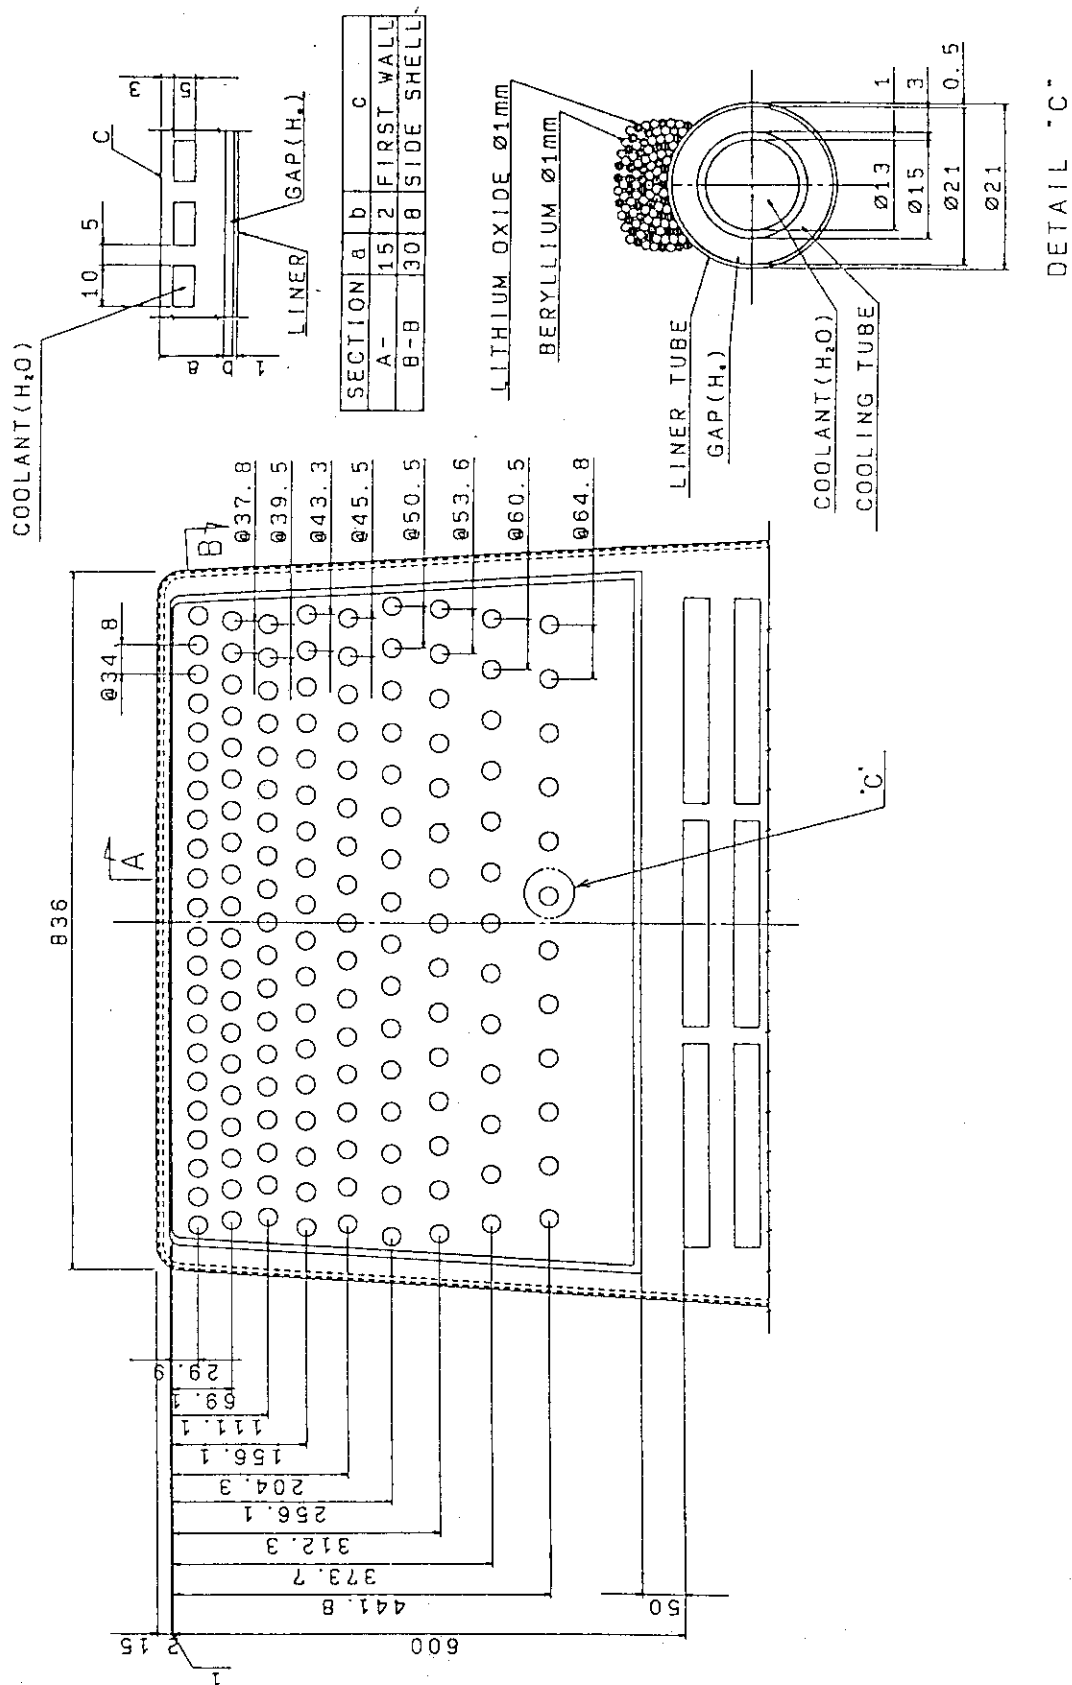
Tube arrangement at top end of the upper unit
